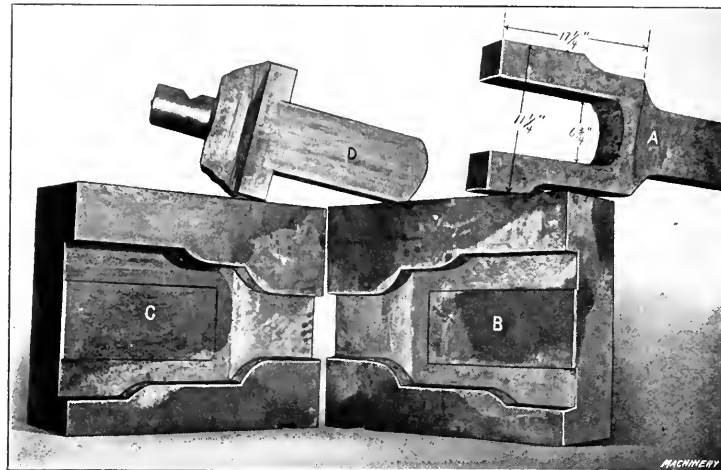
Dies and Tools used in making Locomotive Main Rods in the 6-inch Ajax Universal Forging Machine
